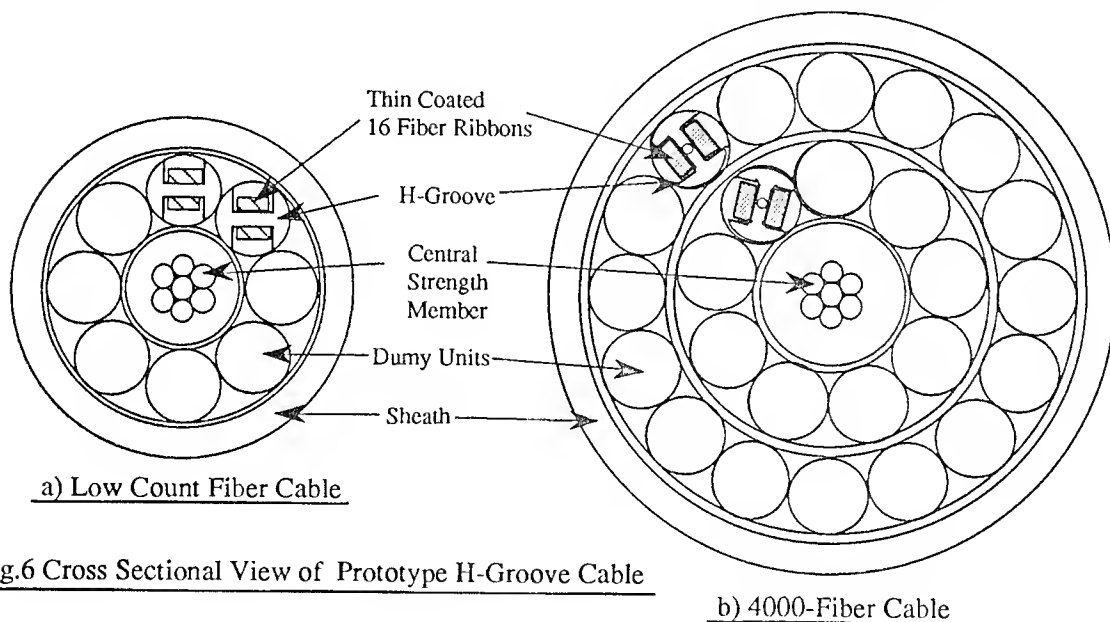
Cross Sectional View of Prototype H-Groove Cable
